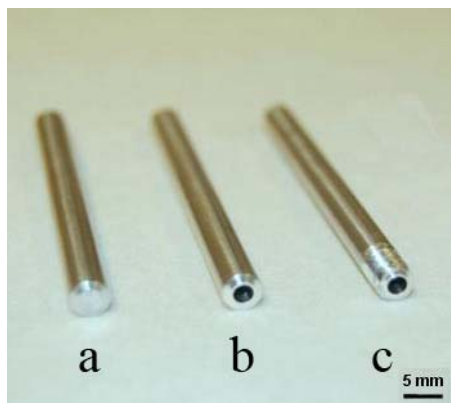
rivet geometries (a – plain, b – hollow, c – hollow)
